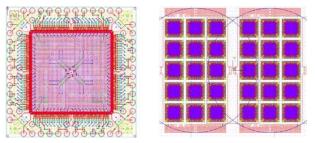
Top view of substrate layout design of (a) single fully-integrated glass package coupon at the size of 15mm x 15mm x 0.1 mm, and (b) 30 coupons in total on a 150mm x 150mm glass panel.
